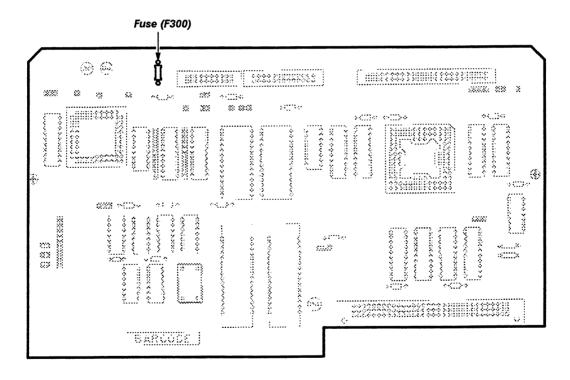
A16 Display Controller Board Fuse Locator Diagram
